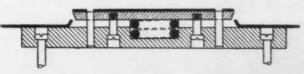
Another type of blanking and piercing tool in which the blanking template is spring loaded.
